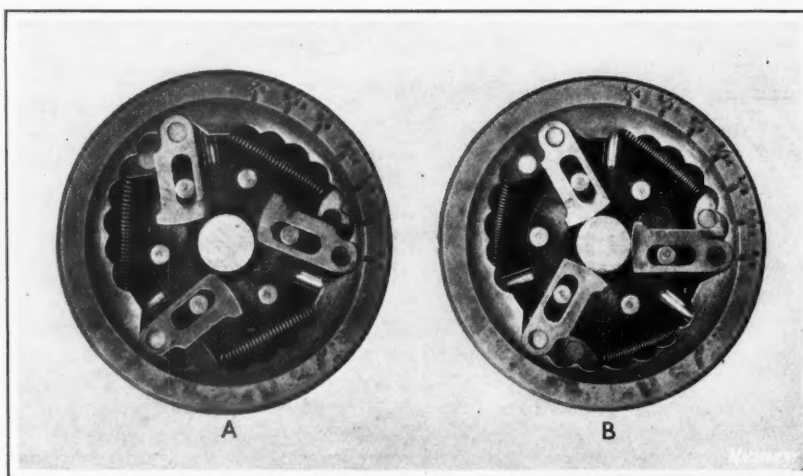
Views of Chuck with Cover removed, showing Jaws in Open and Closed Positions
